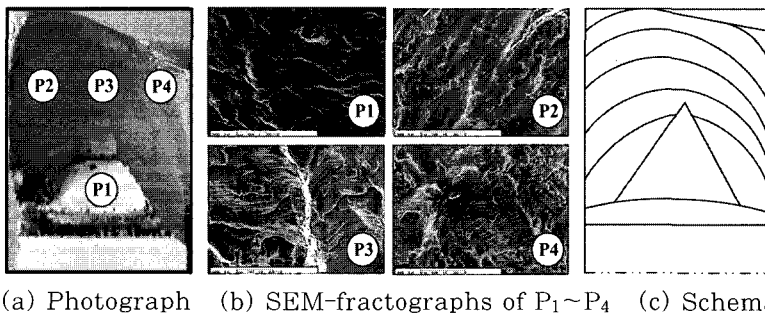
Photograph, SEM-fractographs and Schema of fatigue fracture surface in compression-tension
